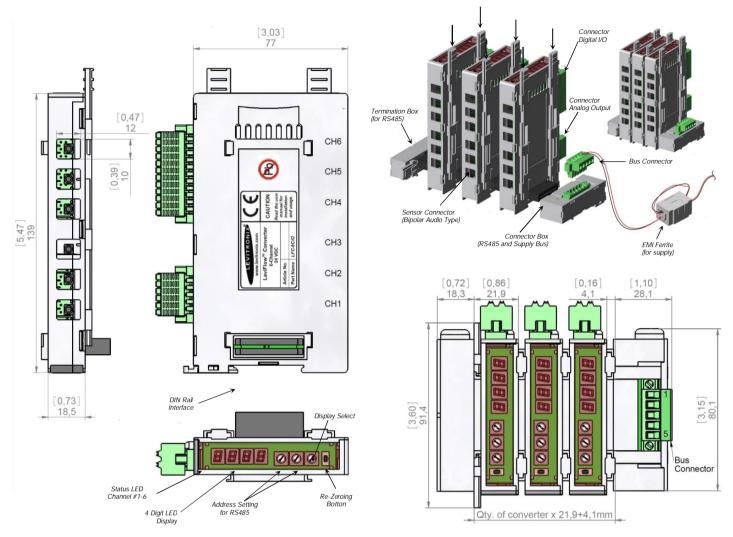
Dimensions, mounting and stacking concept of LFC-6CIO
